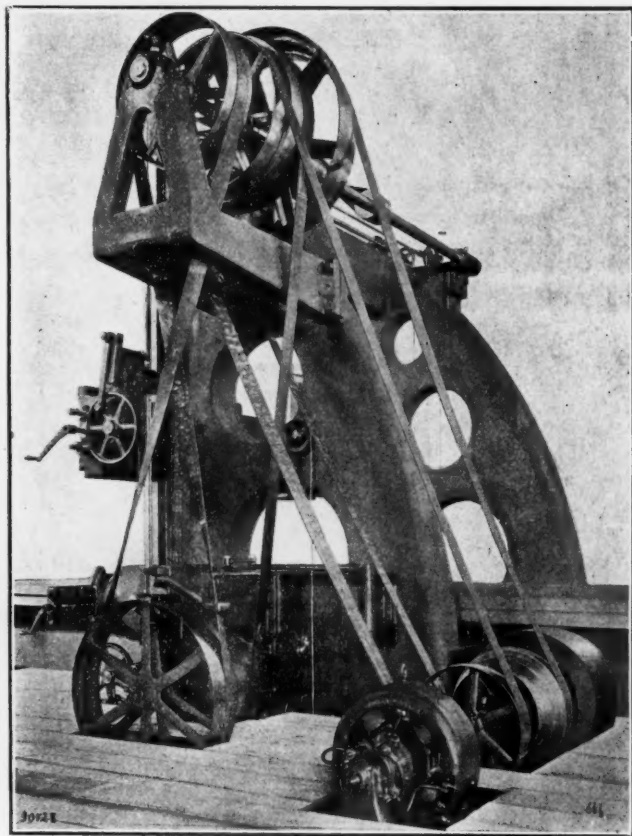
AN INTERESTING MOTOR DRIVE UPON A HEAVY BETTS PLANER, USING AN UNUSUALLY HEAVY FLYWHEEL. CROCKER-WHEELER MOTOR.
